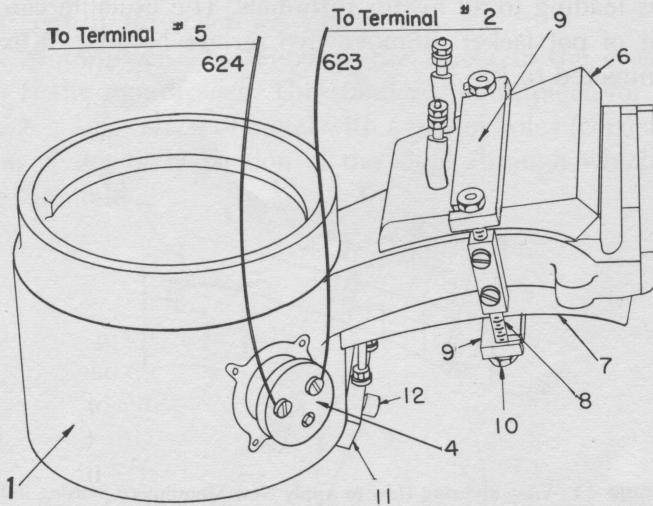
View Showing Method of Mounting Upper Throat Heater to Crucible
